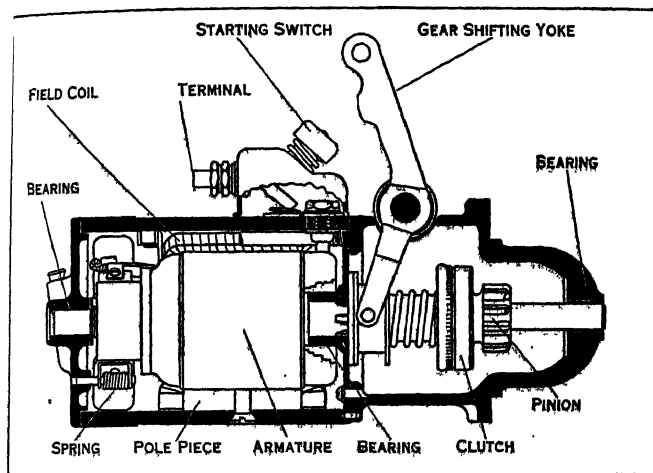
SECTIONAL VIEW OF STARTING MOTOR
